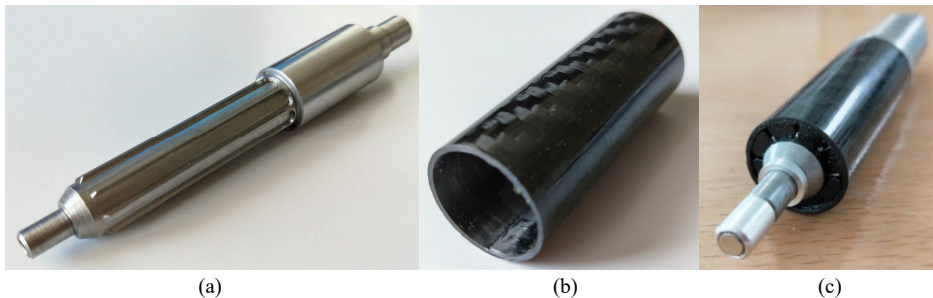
SPM rotor and components. (a) Shaft. (b) Carbon fiber sleeve. (c) SPM rotor.
